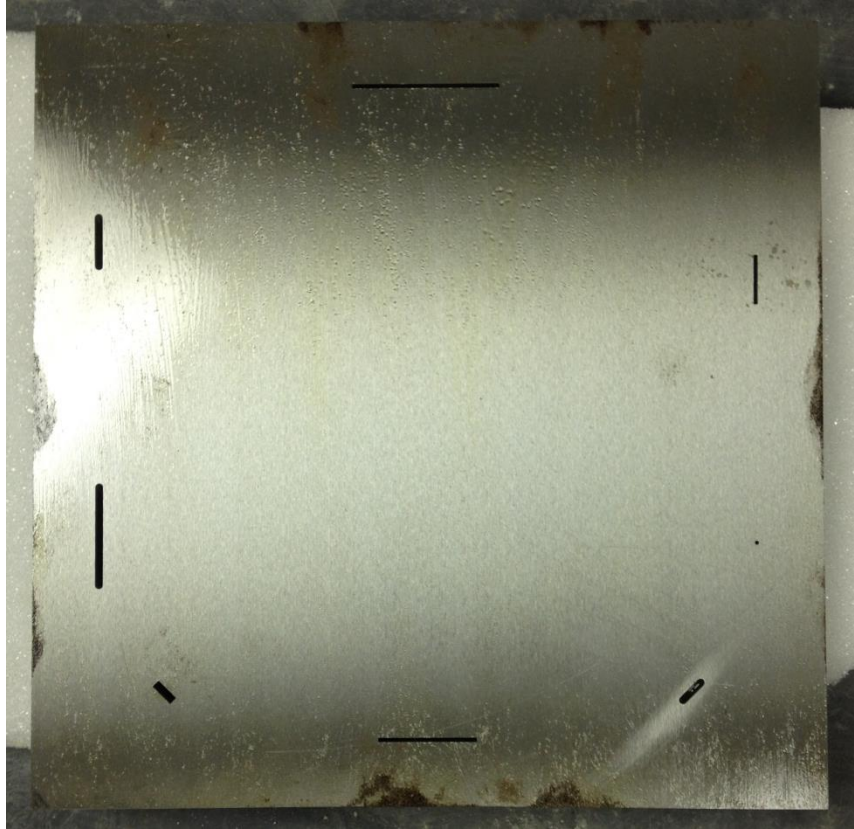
LA1 test specimen containing 8 defects with different geometries
